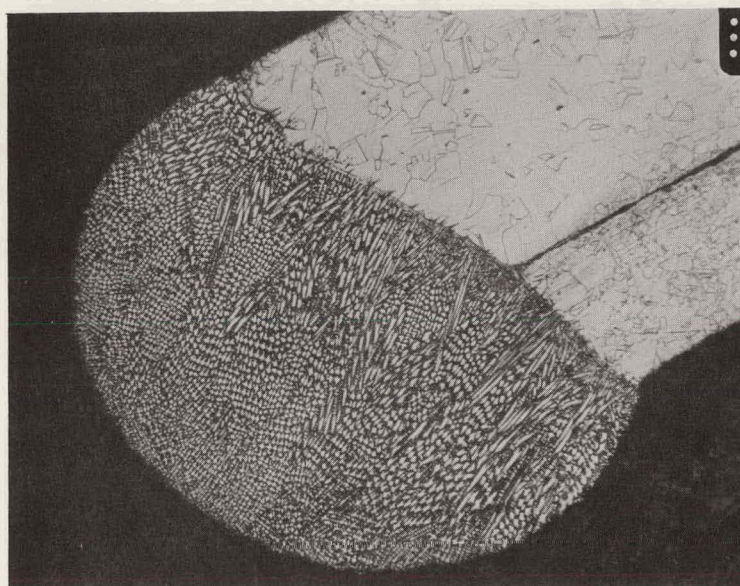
Cup Type End Cap Weld without Chill. Note How Bump is on Outside of the Tube.
